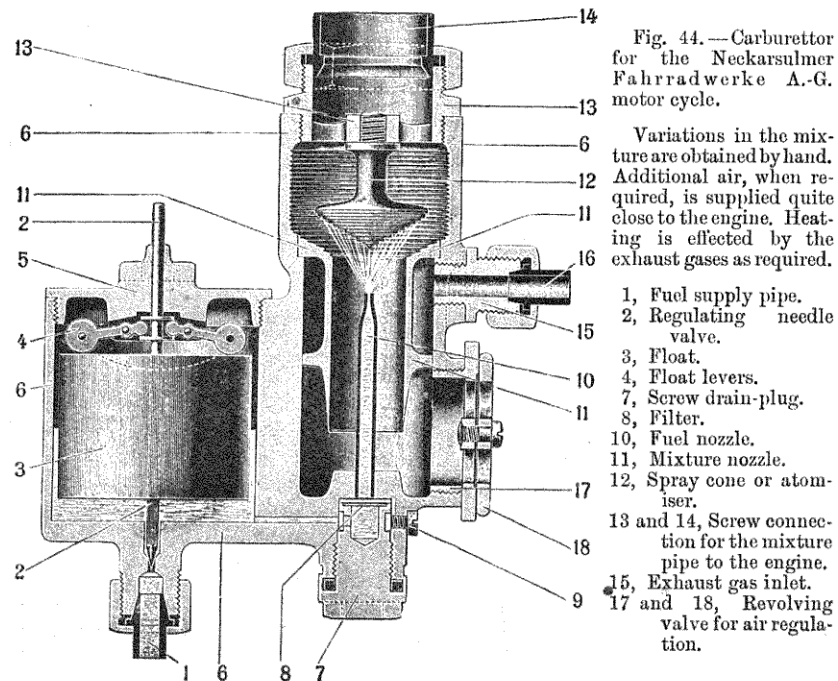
Carburettor for the Neckarsulmer Fahrradwerke A.-G. motor cycle.
